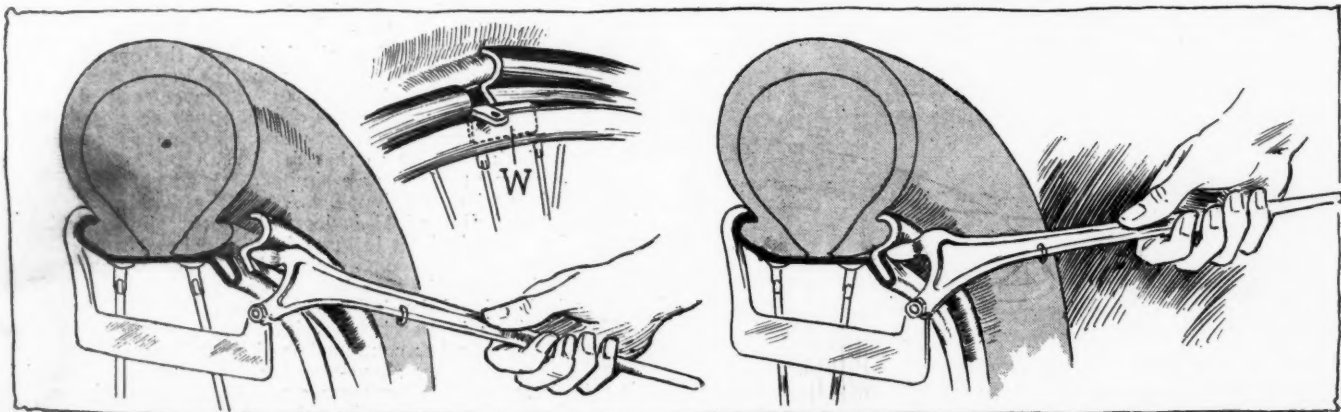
Detail removing the Houk rim. Tool used for removing the locking ring. Fig. 8—Same tool inserting the ring
